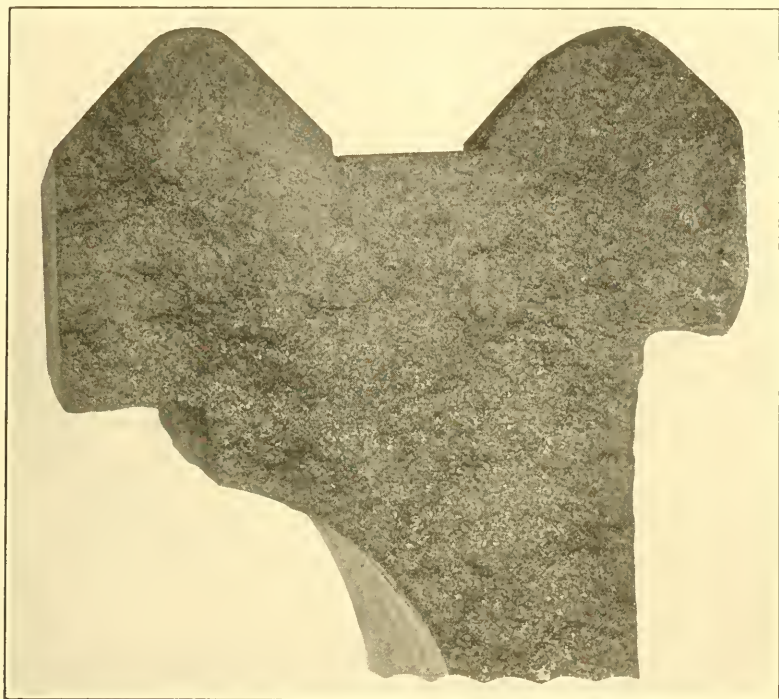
CROSS-SECTIONAL FRACTURE OF CHILLED LATHE-BED
